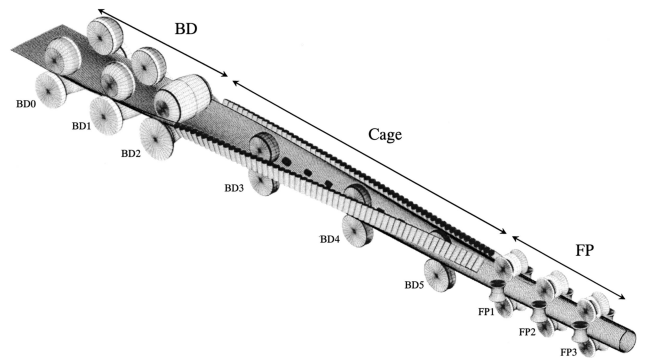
The former forming mill (cage roll forming mill) of NSC Hikari 24" ERW mill
